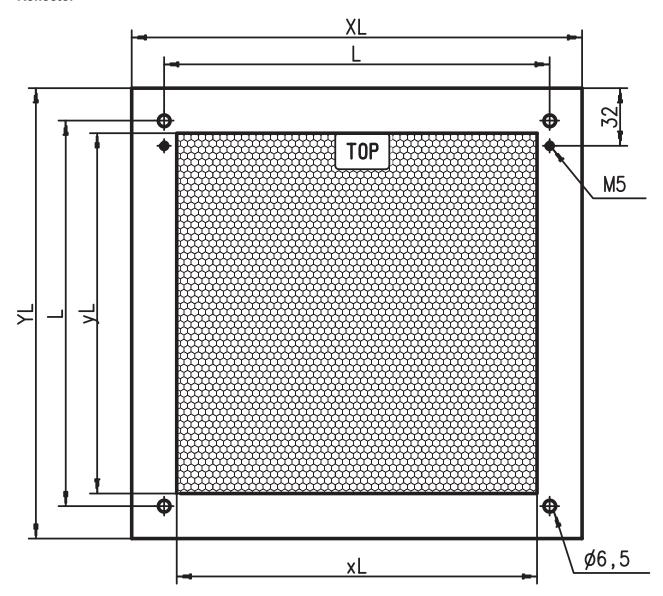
Dimensioned drawing of reflective tape on carrier plate All dimensions in mm
